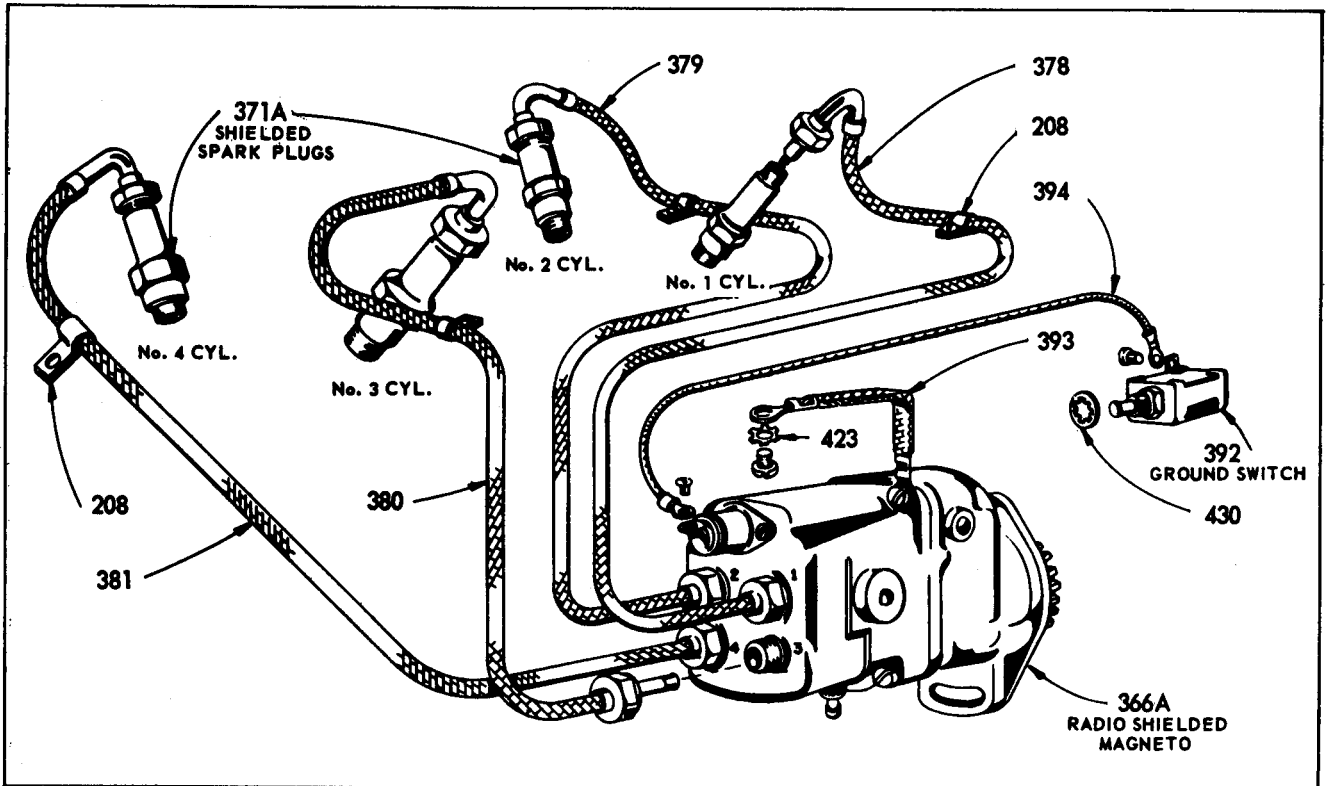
A, RADIO SHIELDED MAGNETO IGNITION FOR MIL-E-11275-B ENGINES
